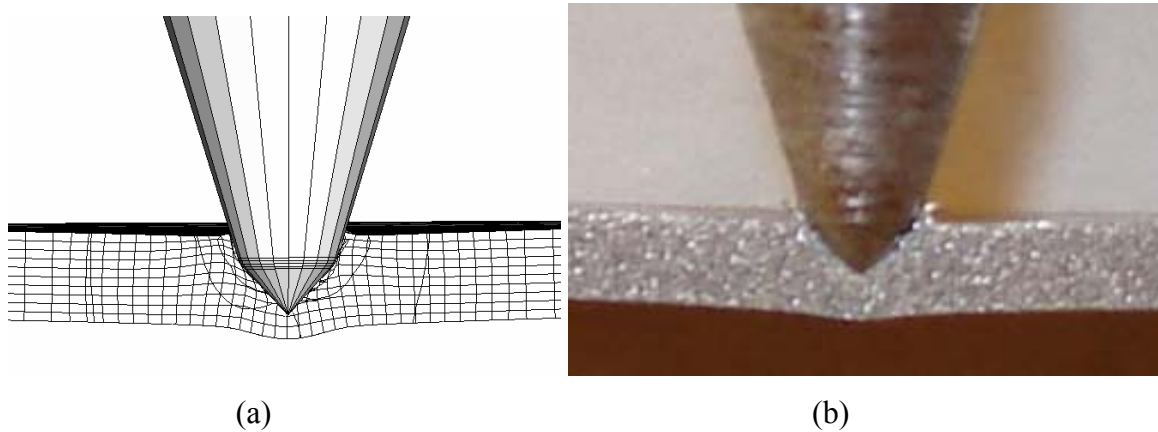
Comparison of the tool-workpiece relative position at peak thrust force (a) FEM model, 1.78 mm tool travel from the initial tool-workpiece contact, and (b) experiment, 2.75 mm tool travel from the initial tool-workpiece contact (4.23 mm/s tool feed rate).
